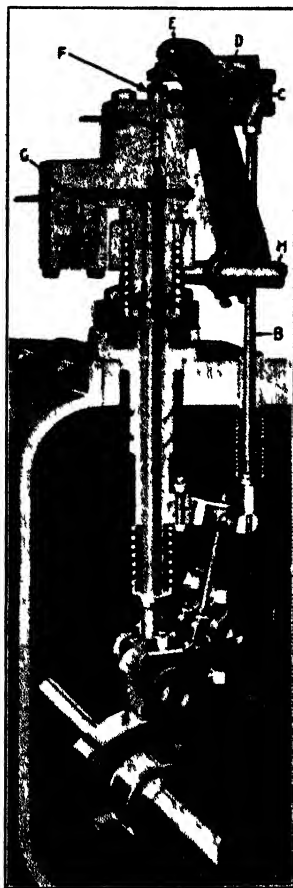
Fuel pump of Ingersoll-Rand engine.
